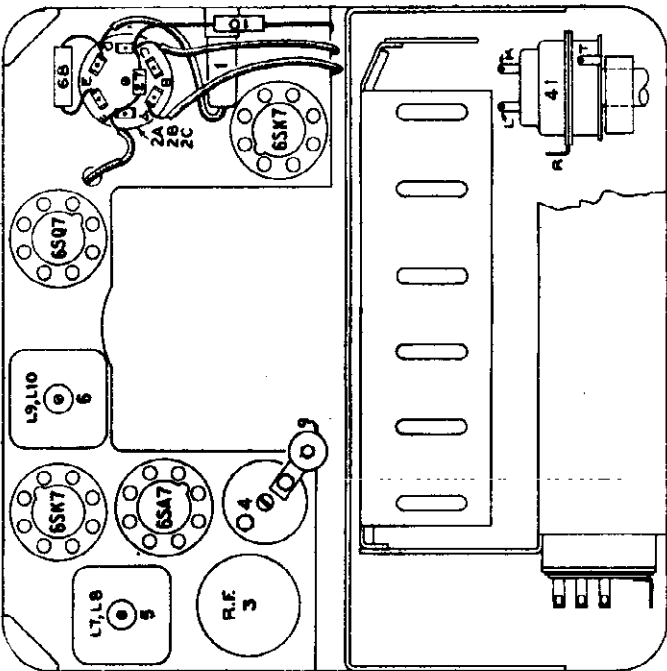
PARTS LAYOUT--I-P UNIT--TOP VIEW
